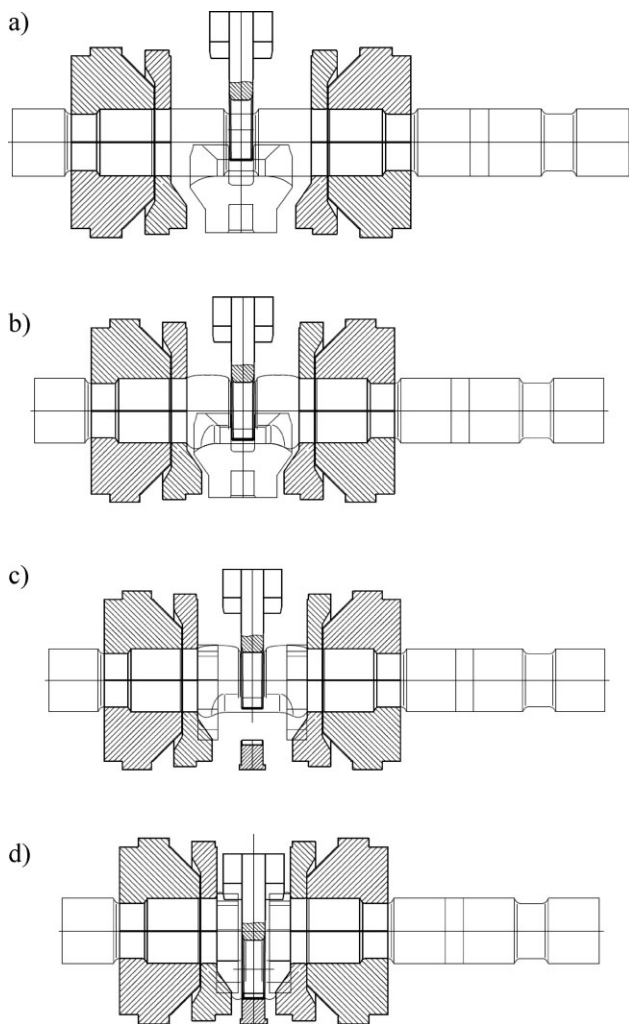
Schematic illustration of forging: a) beginning of the unsymmetrical preupsetting; b) end of the unsymmetrical preupsetting; c), beginning of the forging of the crank throw; d) end of the forging of the crank throw.
